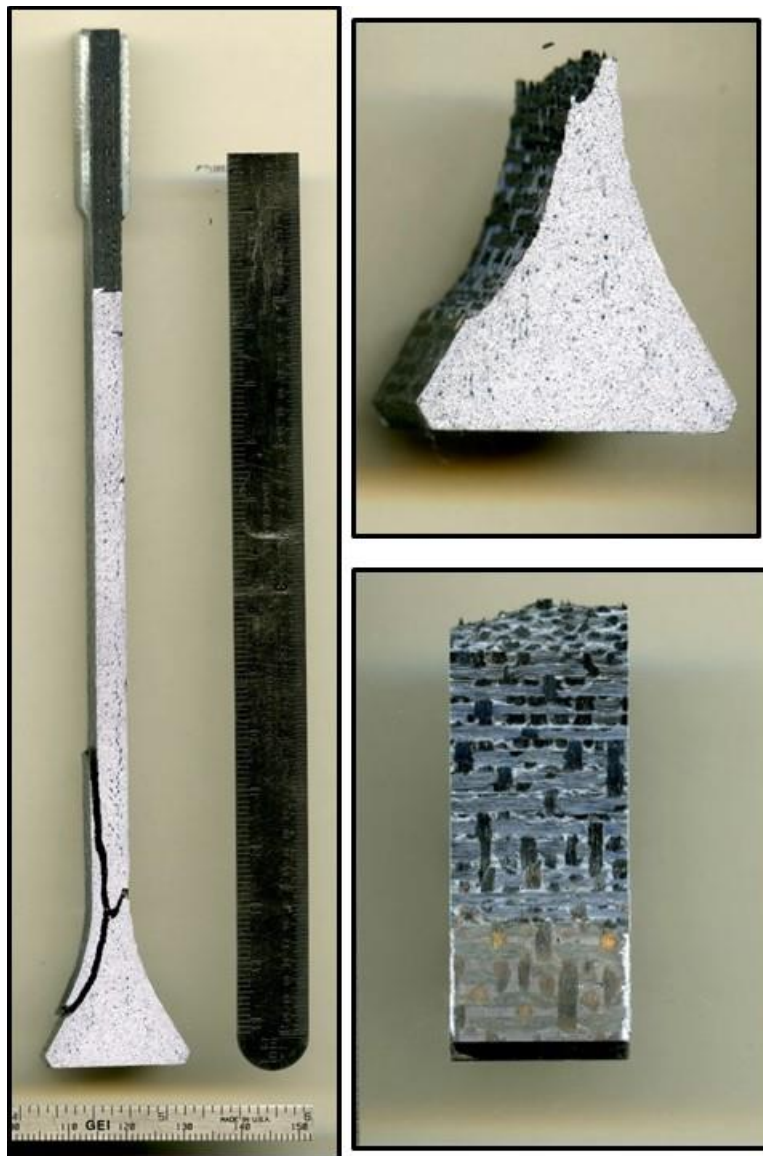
Photograph of Failed Subelement Tension Test Specimen (15-543)
